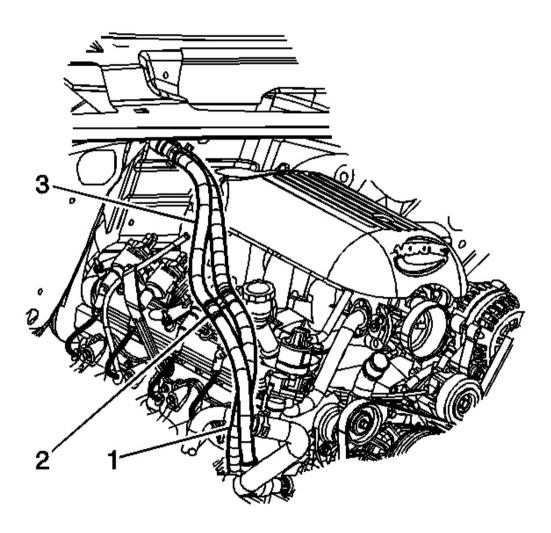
Heater Inlet Hose & Mounting Clip Courtesy of GENERAL MOTORS CORP.
